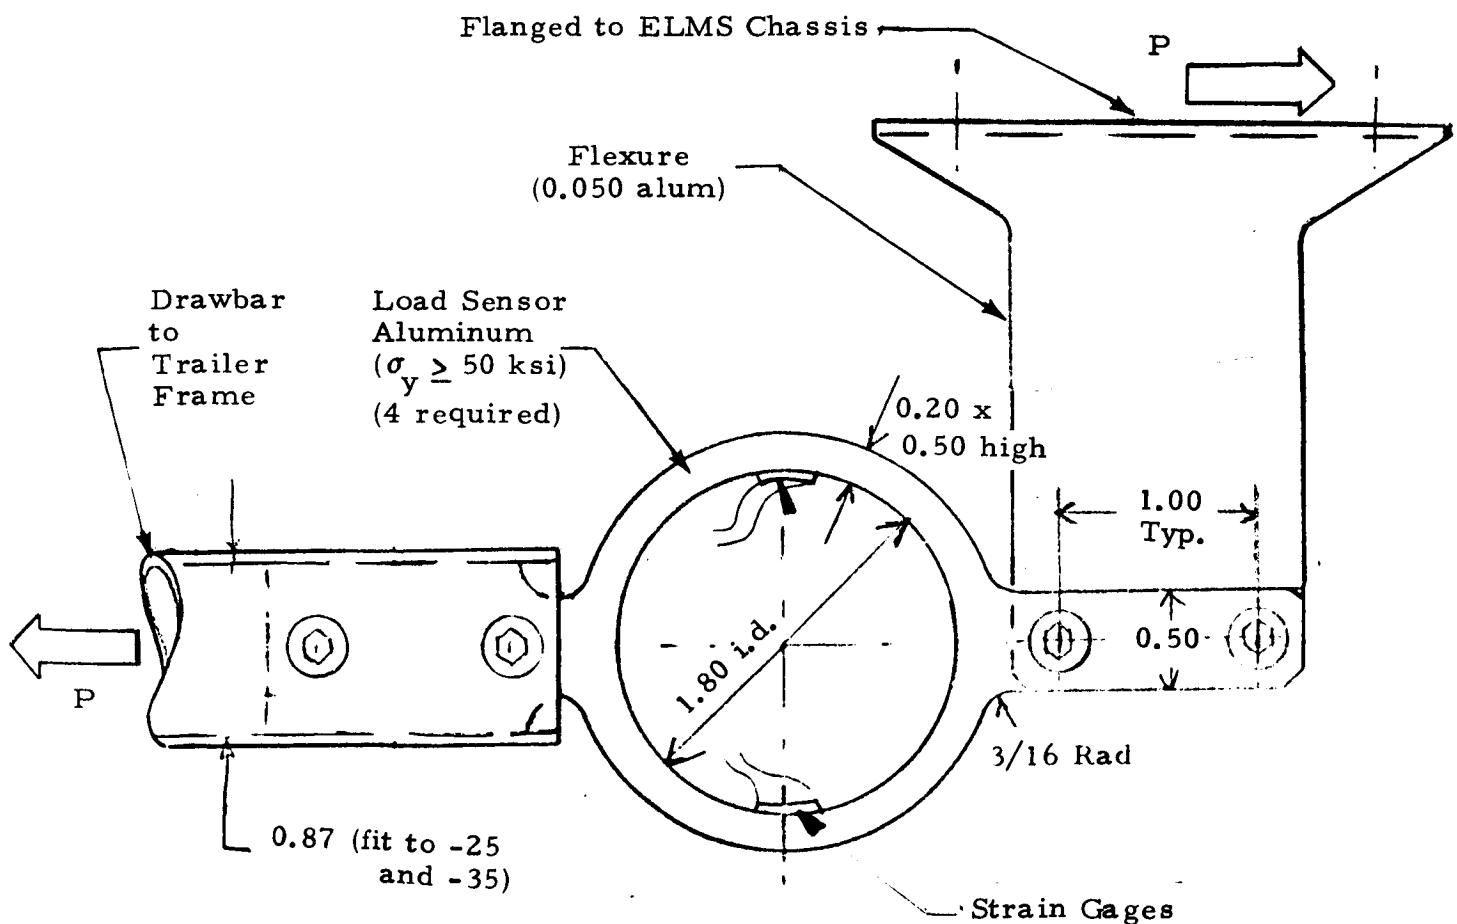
Ring Sensor Design to Measure Drawbar Pull and Pitch Torques. Ring dimensions as sized in Appendix O.
